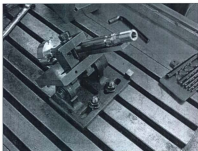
Setup for drilling the wiring exits and entrances to the central passageway.
